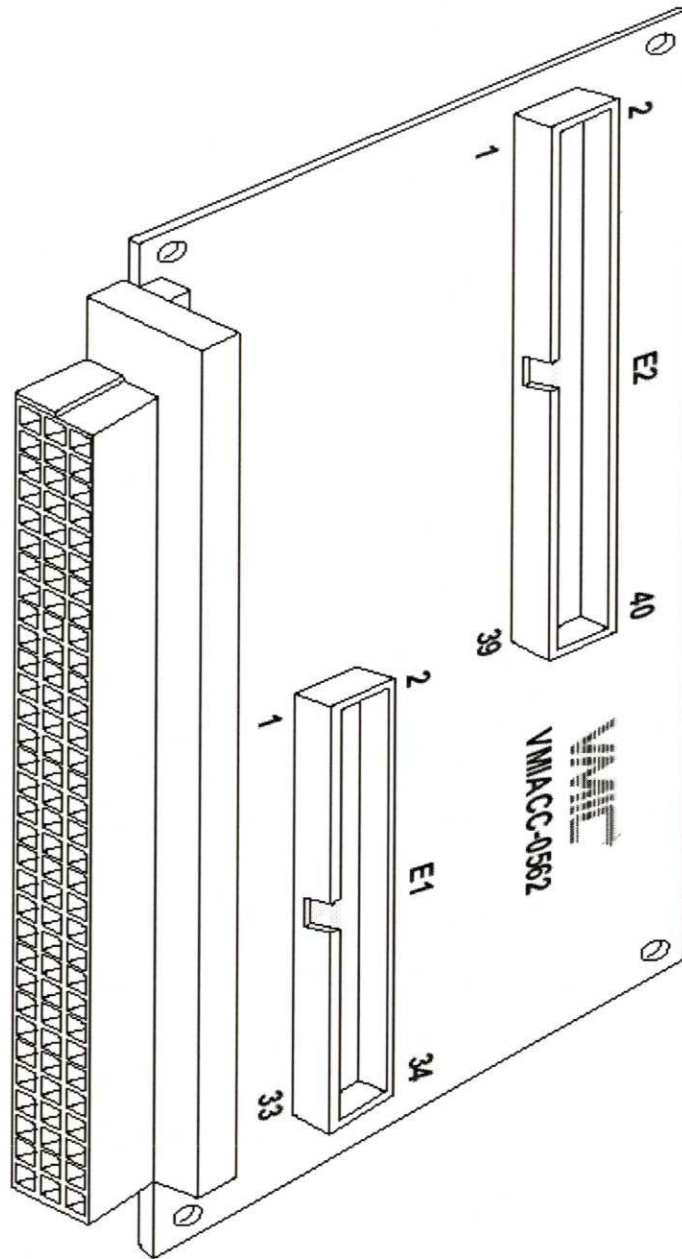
VMIACC-0562 IDE/Floppy Drive Adapter Board
